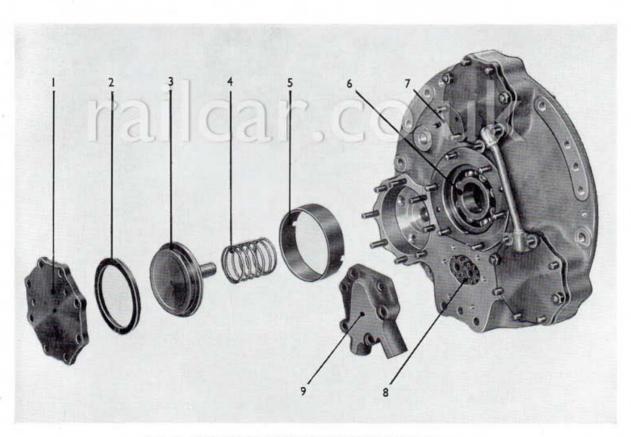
VIEW OF TOP SPEED PISTON ASSEMBLY AND OIL PUMP.
